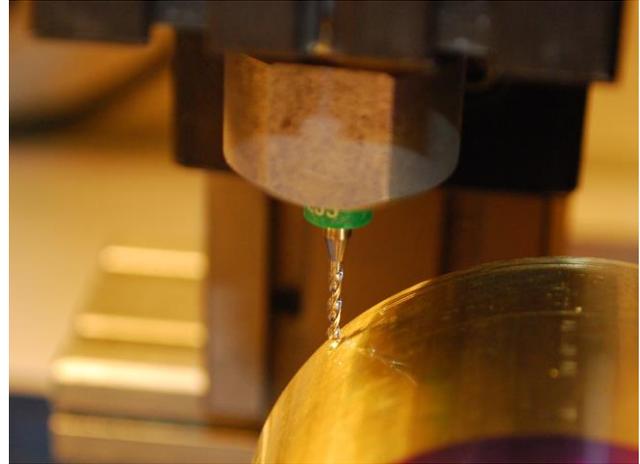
Drilling the cable through-hole. A pilot dimple is first drilled straight on. The barrel is then rotated 30 degrees (one hole of a 12-hole circle) and the drill re-aligned with the dimple. Light pressure on the drill is required until the bit establishes its new direction.
